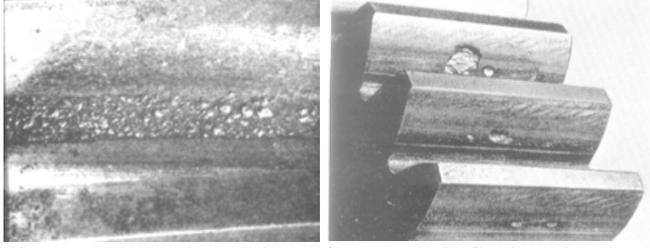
(a) Micropitting of gear teeth flanks (the depth usually does not exceed 20 μm [37]) (b) progressive pitting of gear teeth flanks
